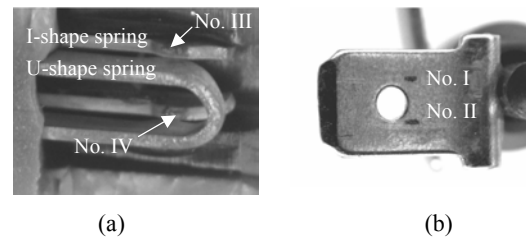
Observation of the contact pairs. (a) The springs in the socket; (b) The face of the mating plug sheet
